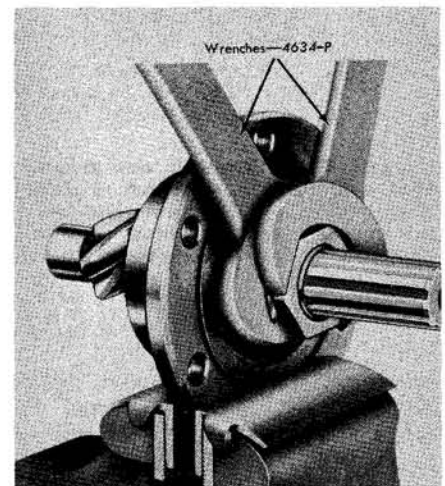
Adjusting main drive bevel pinion preload before final assembly.
